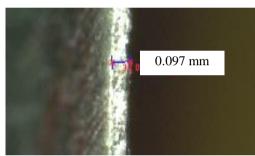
Biggest Burry dimension at material 0.8 mm
